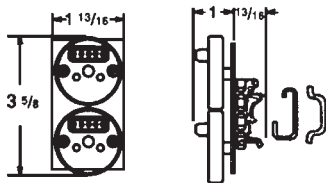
TX90-DIN DIN Rail Mounting Adapter (in inches)
